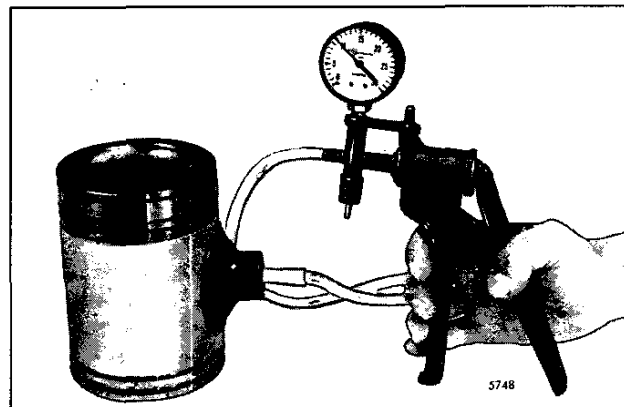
Checking Piston Pin Retainer for Proper Sealing with Tool J 23987-01
